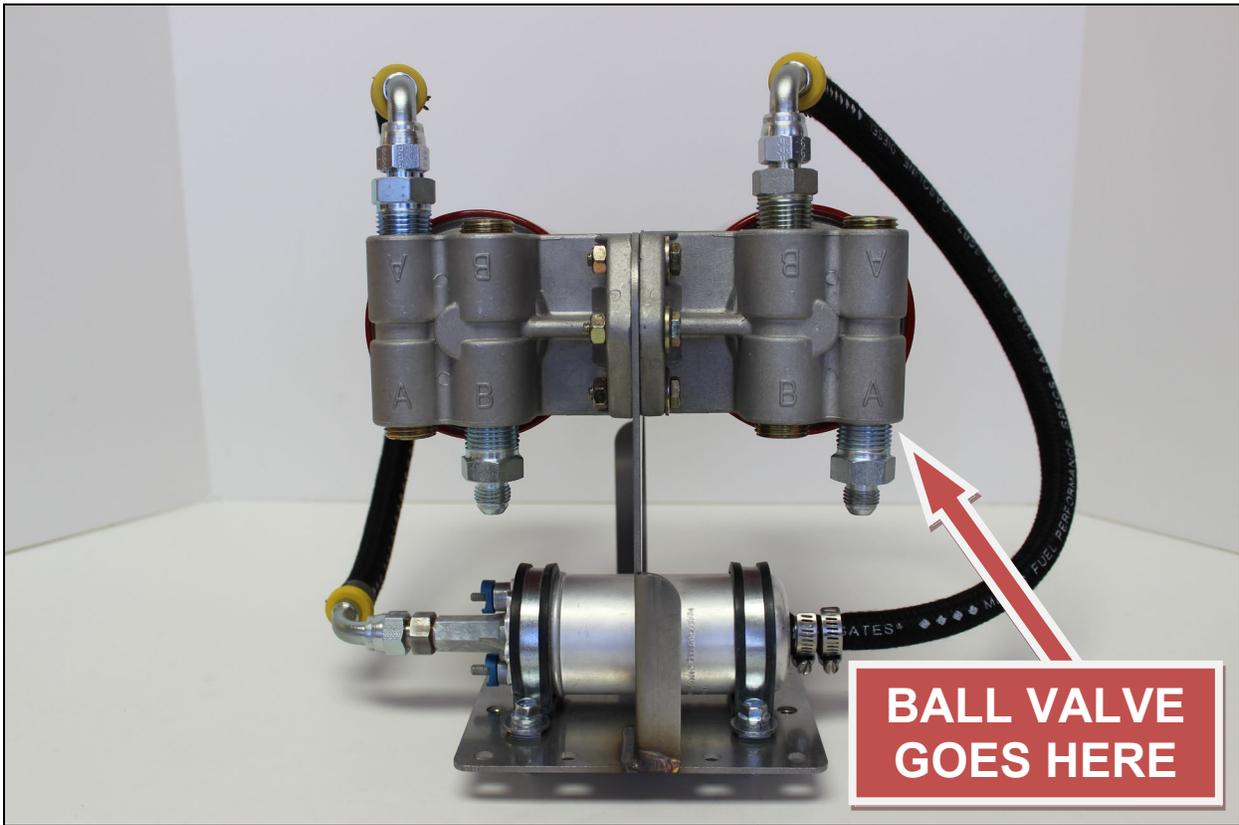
FUEL FILTER FITTING LOCATIONS AND HOSE ROUTING – BALL VALVE NOT SHOWN
